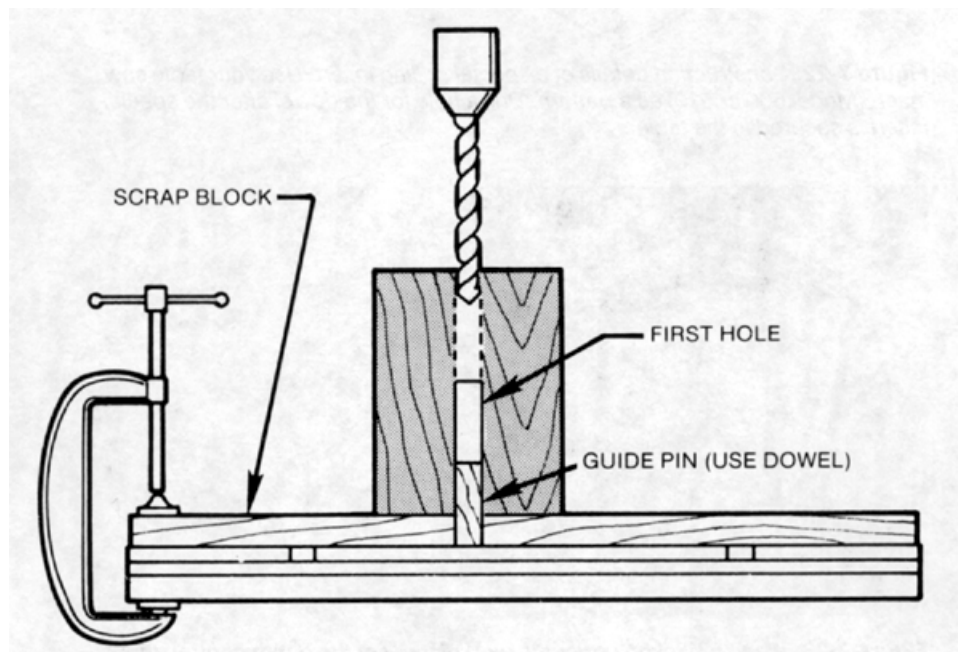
This is one way to drill from both ends of extra-thick stock. The work, positioned over the guide pin, is accurately placed for the second hole.
